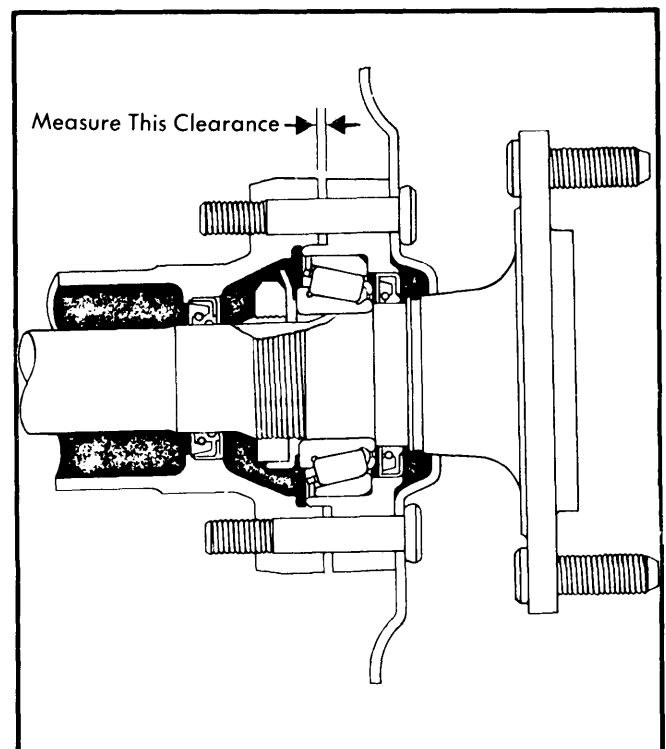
Sectional View of Axle Shaft Bearing Assembly Measurement for Rear Axle Shaft Shim Requirements
